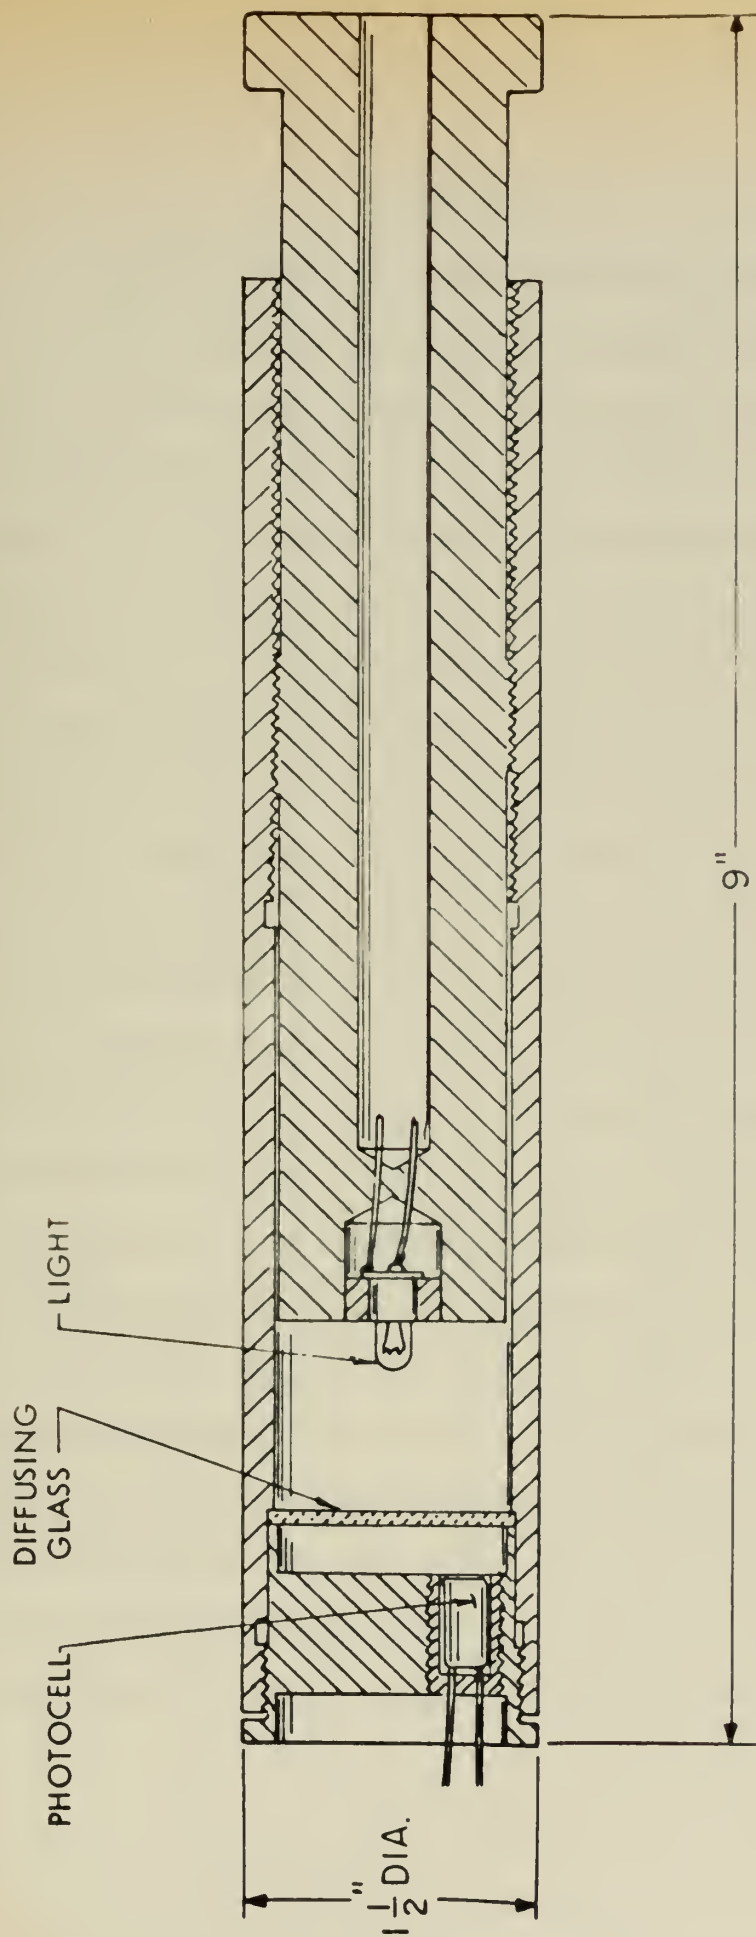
(c): SECTIONAL VIEW OF PHOTOCELL-LAMP PACKAGE
